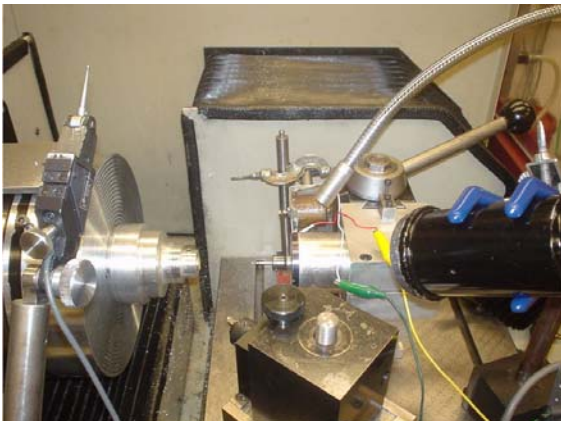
Boring tool mounted in high-speed spindle is used to bore a test hole in the part mounted on the spindle at left. The runout of the hole is measured with an electronic indicator.
